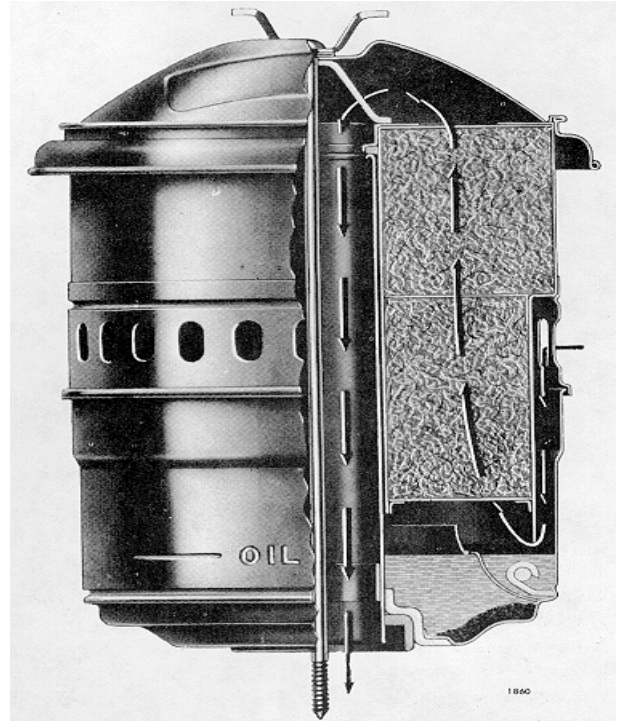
Light Duty Oil Bath Air Cleaner and Silencer Assembly
